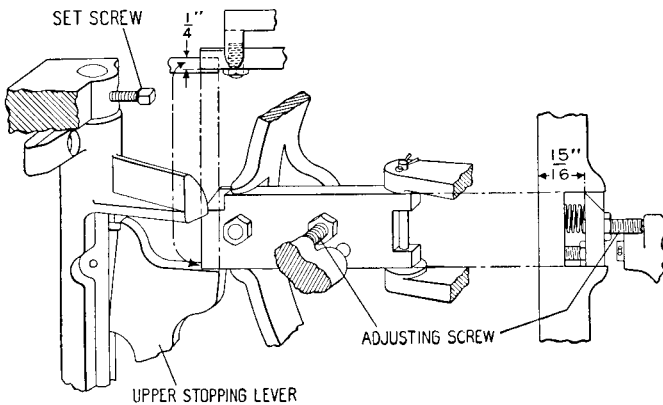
View of the stopping mechanism of the machine, showing the distances for adjustment when the machine stops in normal position.
